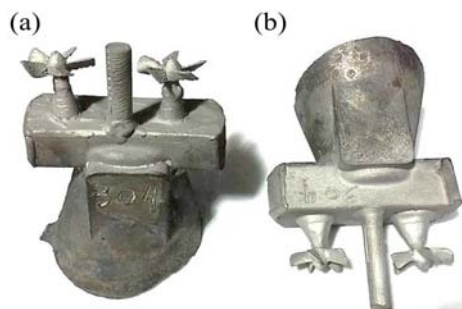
Product cast directly after 3D printing (a) and product cast using silicone mold after 3D printing (b)
